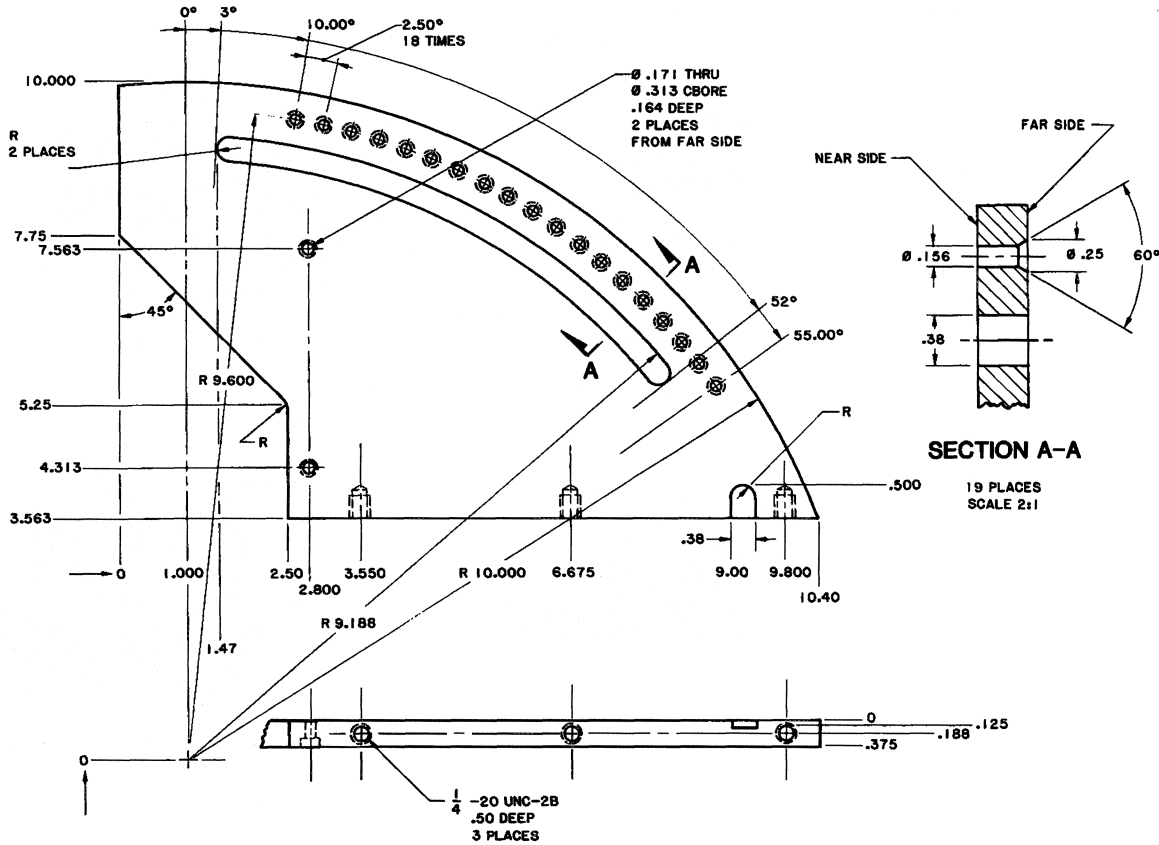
Detail of a Mechanical Part with a Removed Section
